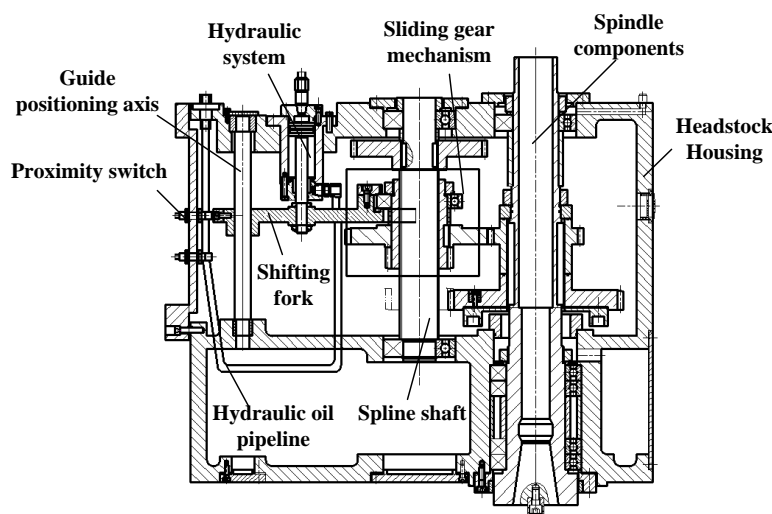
Spindle Box Assembly Drawing of Vertical Machining Center
